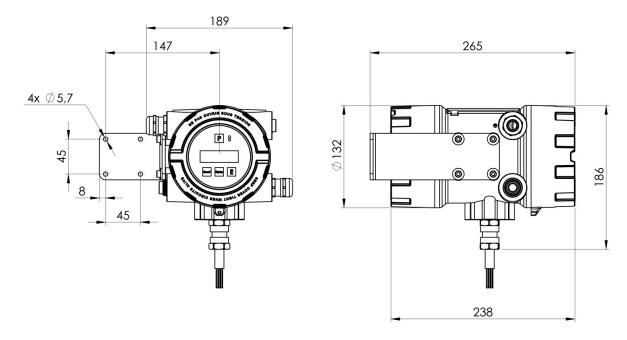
Dimensions TCE8000-E-* (except *A)
